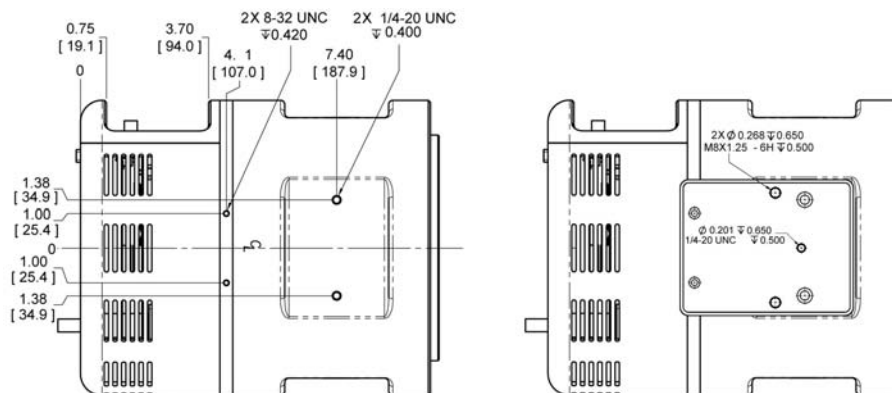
Mounting Holes on 165 mm Camera (left); Mounting Adapter (right)
